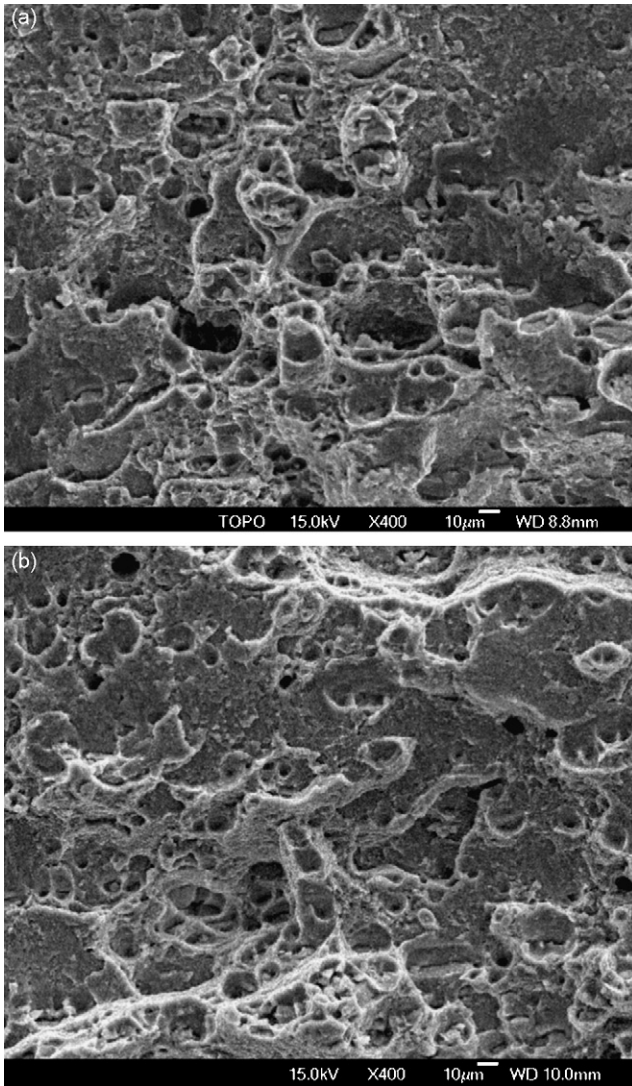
Fracture surfaces of the tensile tested specimens at a welding speed of 80 mm/min (a) and 325 mm/min (b).
